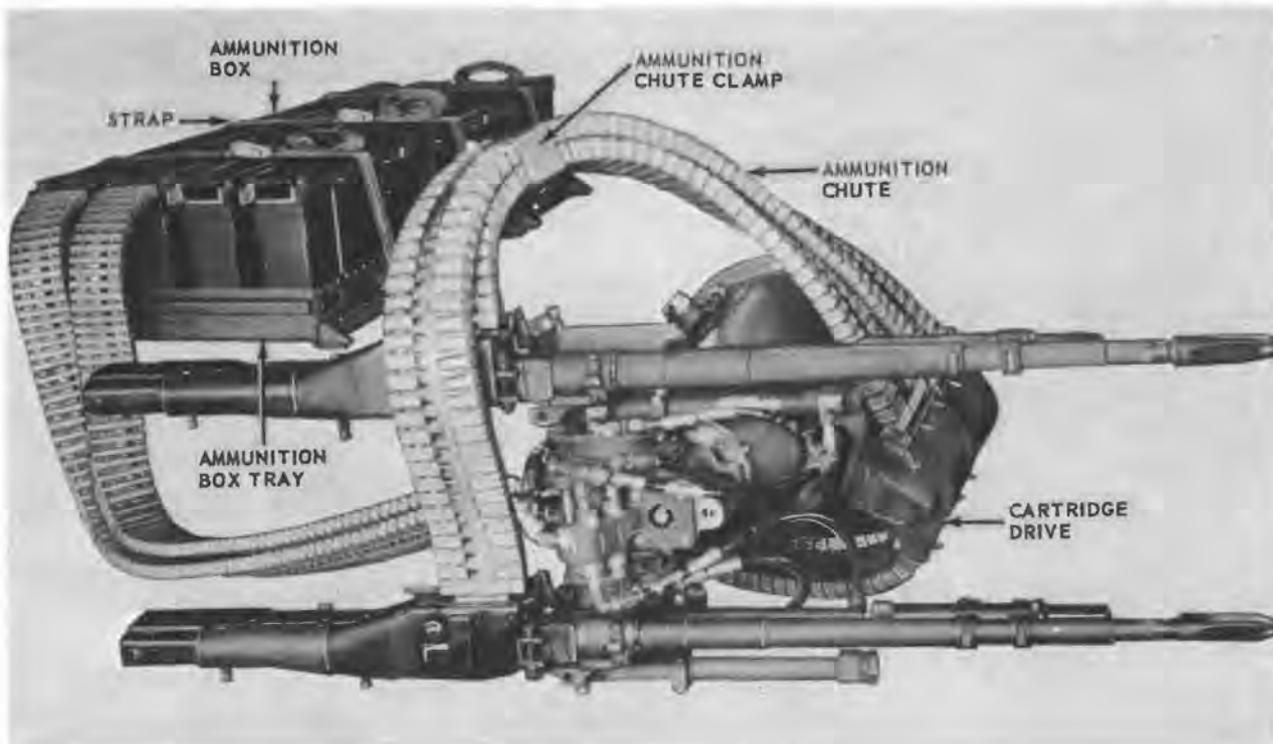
XM6E3 Machine gun — ammunition feed group
